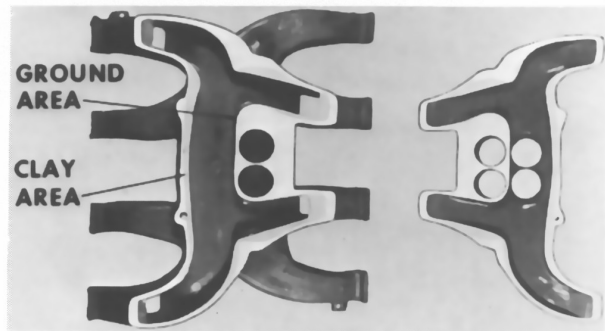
High-riser intake manifold sectioned through upper plenum
